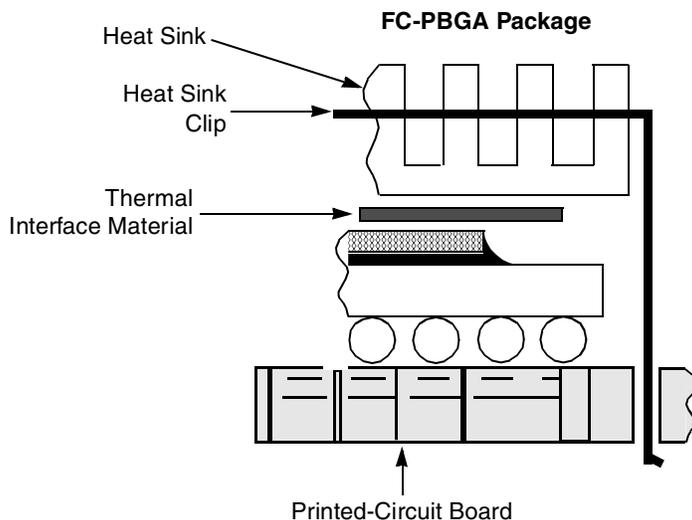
FC-PBGA Package Exploded Cross-Sectional View with Several Heat Sink Options
